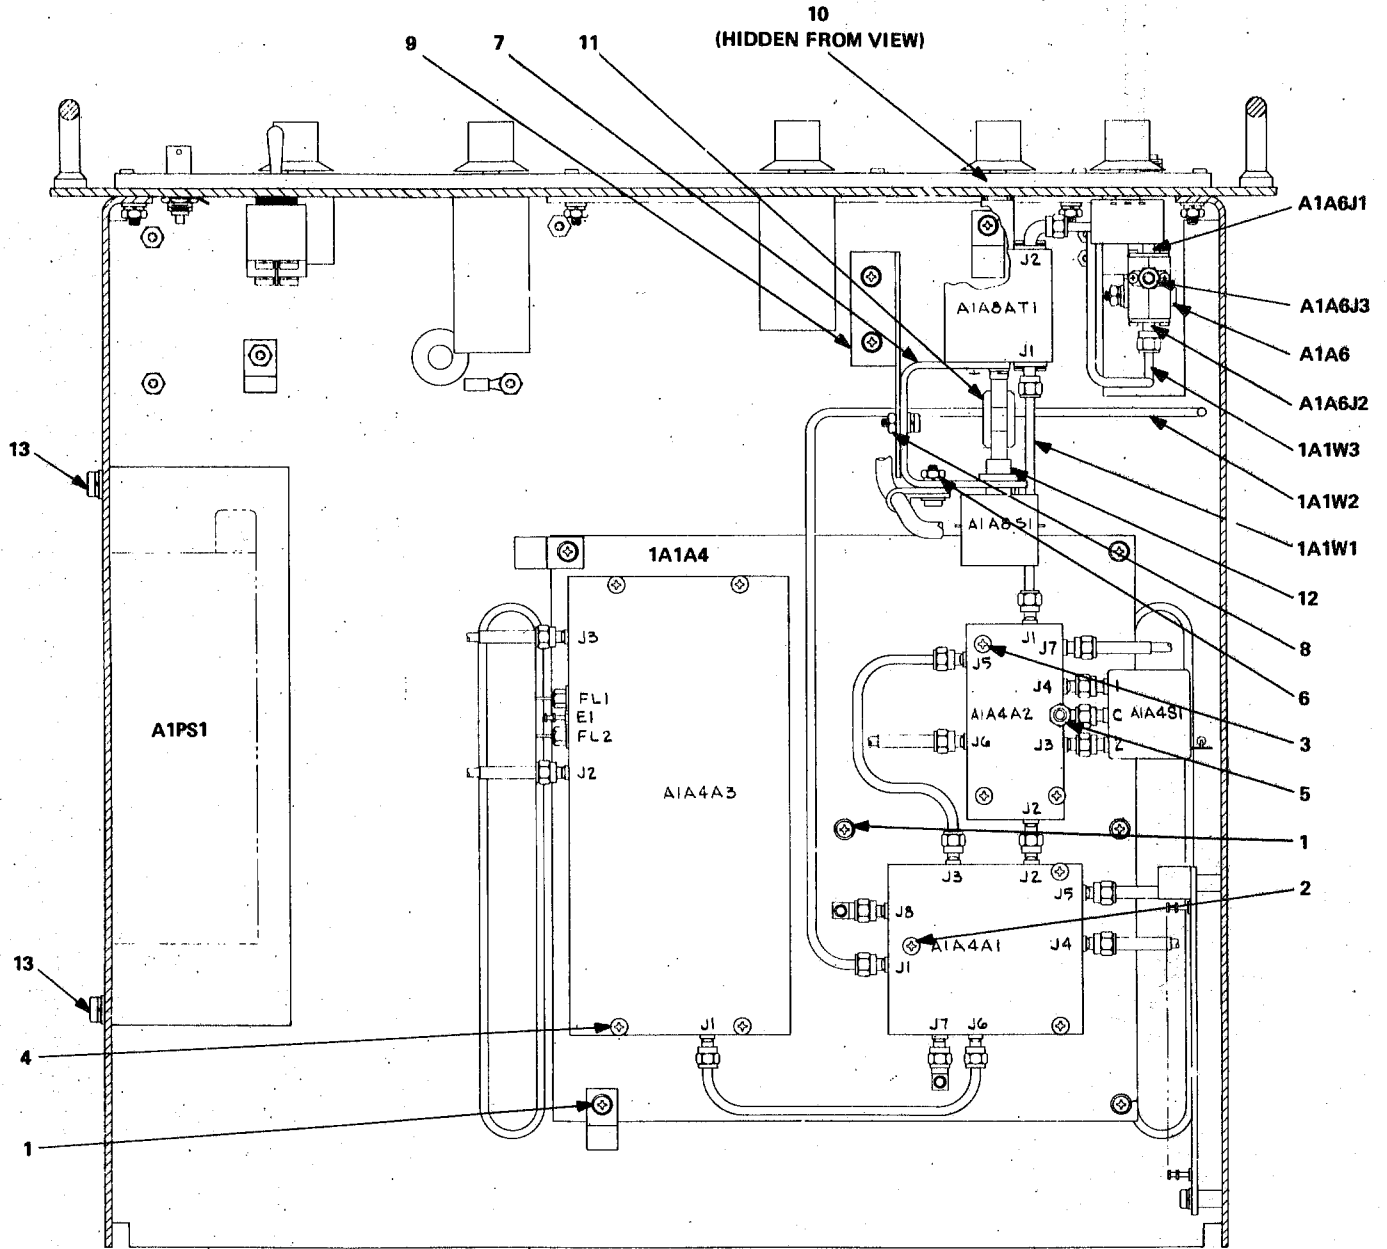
Electronics Assembly 1A1 With Digital Assembly 1A1A2 and Microwave Interface 1A1A3 Removed
